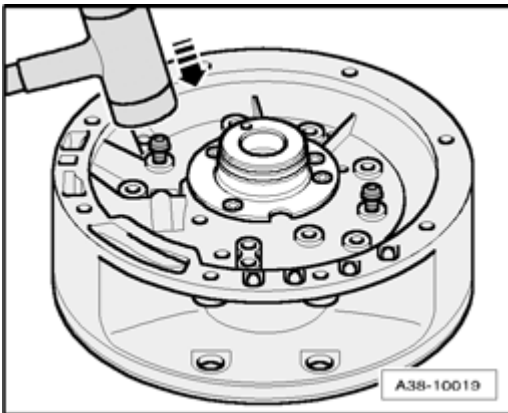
Tapping On ATF Pump Bolt Heads Using A Plastic Hammer
